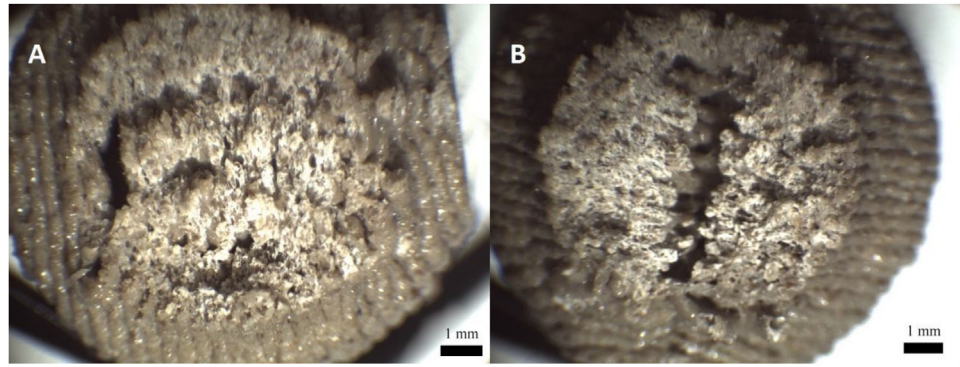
Fractographies of Timberfill specimens printed at 75% with infill pattern. (A) Rectilinear. (B) Honeycomb.
